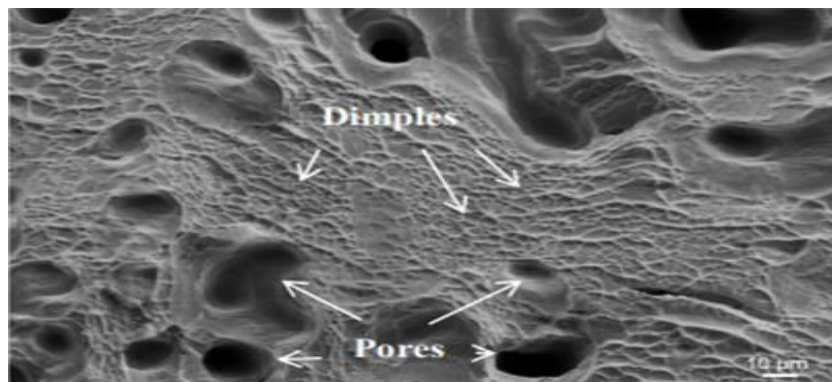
Fracture ductile with the appearance of dimples in as sintered samples³⁴
